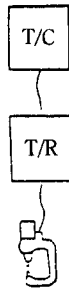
ASSEMBLY OF T/C, T/R AND GUN
